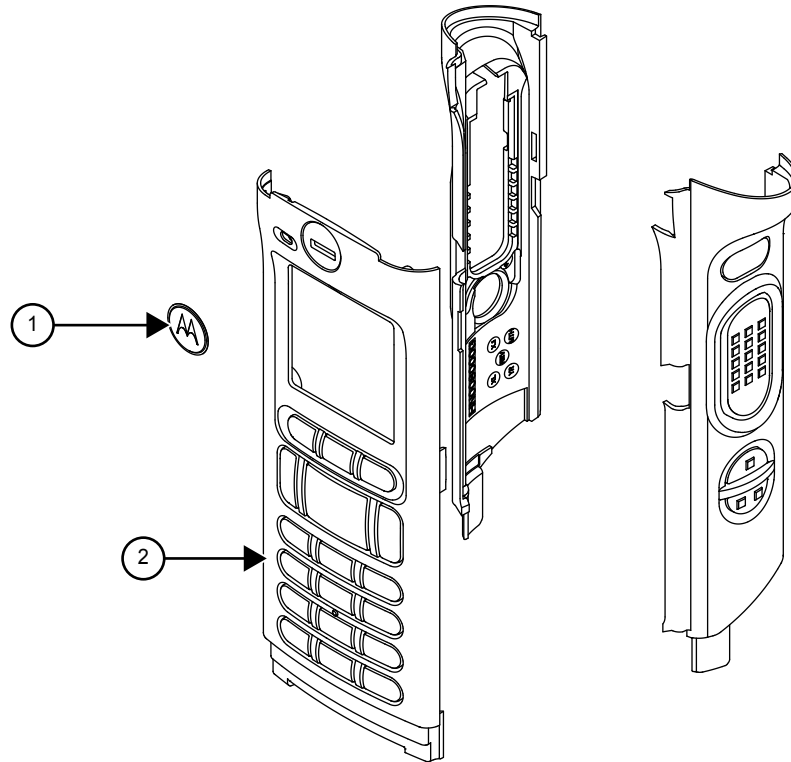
Main Housing Assembly (Dual Display Version, Limited Keypad)
